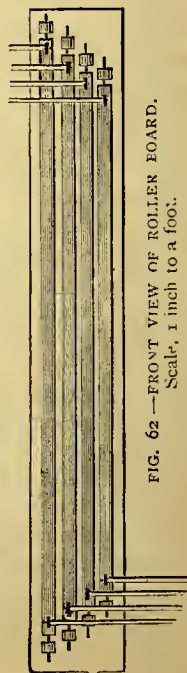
FRONT VIEW OF ROLLER BOARD.
